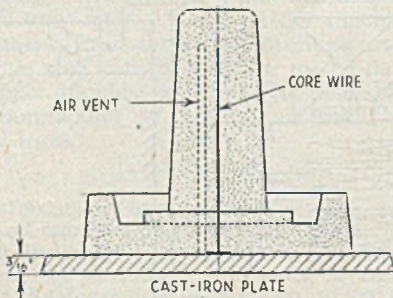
Section through a Finished Core mounted on its Cast-iron Drying Plate.
